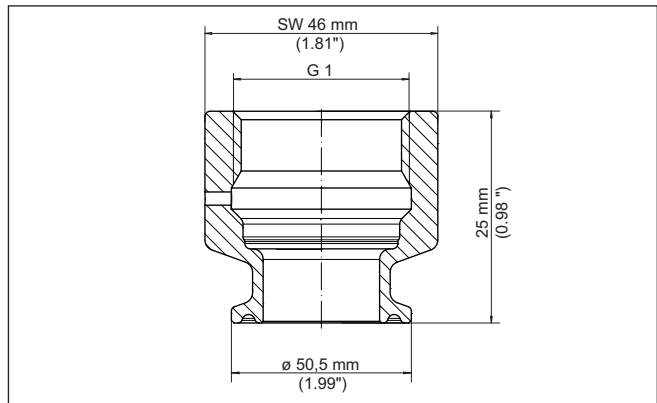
Dimensions hygienic adapter G1 (DIN 3852-X) on Clamp DN 15-20 (DIN 32676, ISO 2852) PN 40 - O-ring seal
